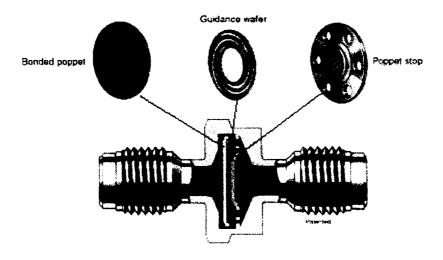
NUPRO "CW" Series all-welded check valves for the Planck cooler.
